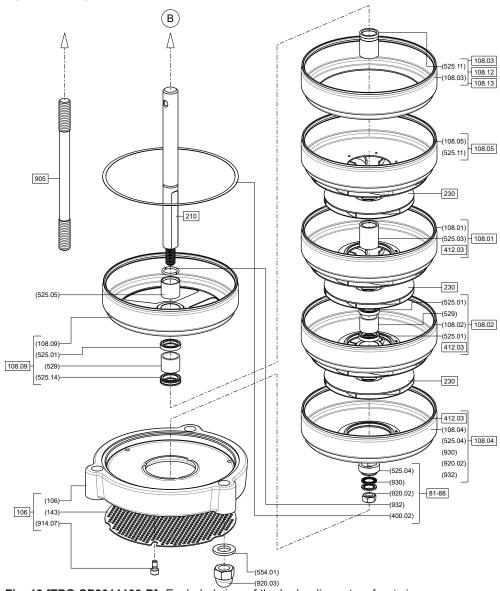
[TPG-SP3011100-D]: Exploded view of the hydraulic system [parts in square brackets can be supplied in packaging units only]
